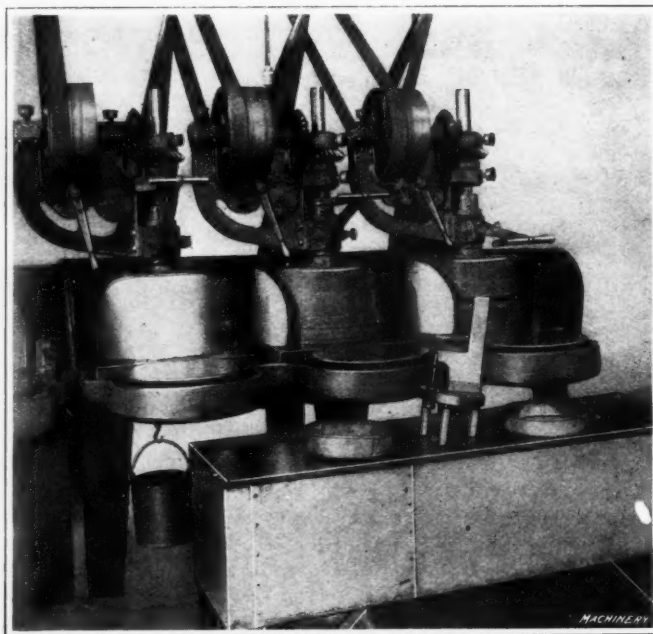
Oil-grinding Machine on which Final Grinding Operation is performed — Attention is called to Dials showing Approximate Time when Grinding will be finished, and Indicator for testing Size of Balls
